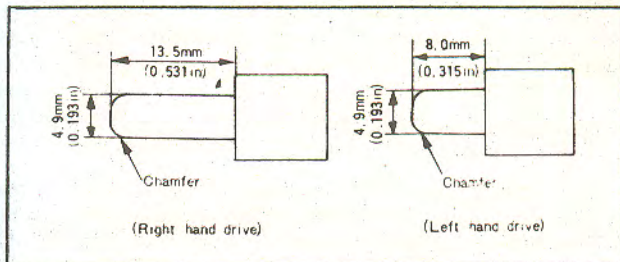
Dimensioning diagram of the guide pin to be used during dismantling and assembling of the master brake cylinder.
